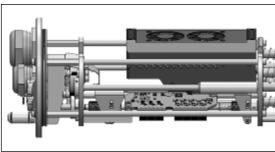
Fitting the PI NetBox into the chassis (right hand view)
